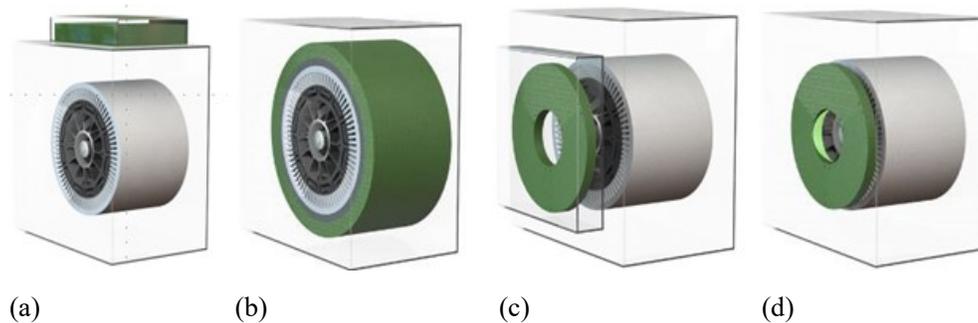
Motor and inverter integration techniques: (a) radial housing mount, (b) radial stator mount, (c) axial endplate mount, (d) axial stator mount.
